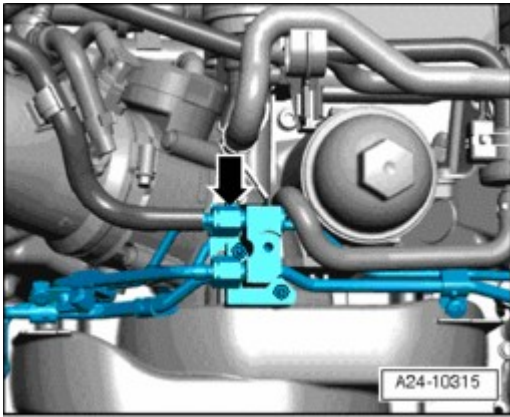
Removing Oil Pressure Switch And Screwing In Oil Pressure Tester V.A.G 1342
